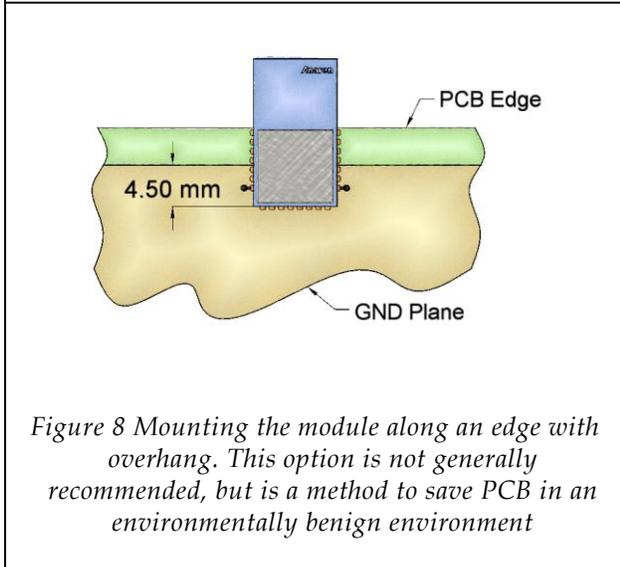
Mounting the module along an edge with overhang. This option is not generally recommended, but is a method to save PCB in an environmentally benign environment
